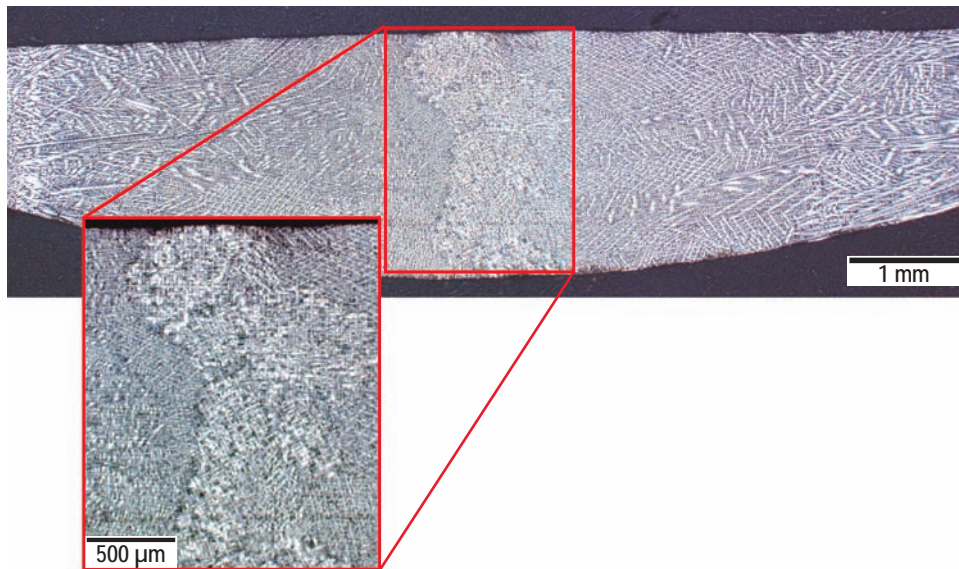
Transverse macro of JT-03_2. Notice that the center of the weld lacks a consistent large dendritic structure (grain) extending through the weld as seen in figure 11. Crown side is up.
